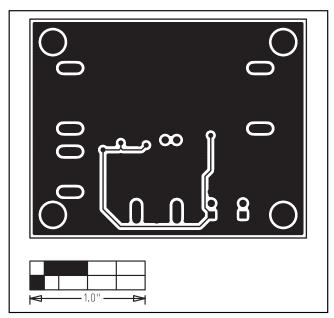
MAX8737 EV Kit PC Board Layout—Solder Side
